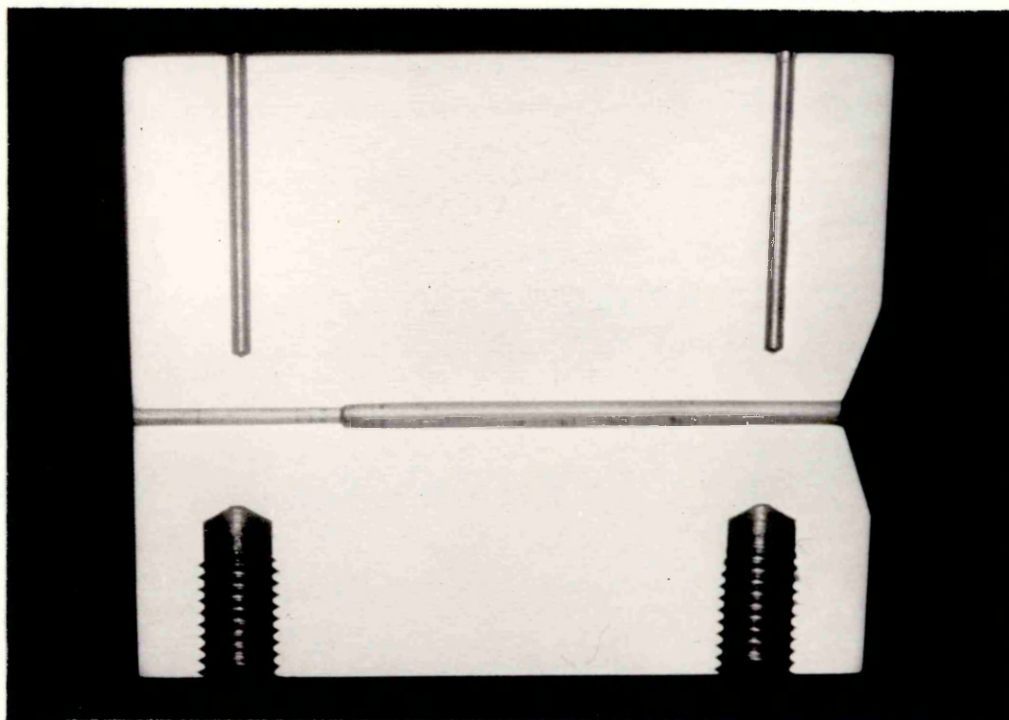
SECTION VIEW OF THE STEPPED BORE
